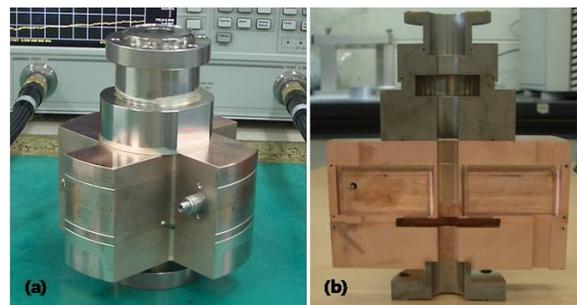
IP-BPM assembled (a), cut for inspection (b).
